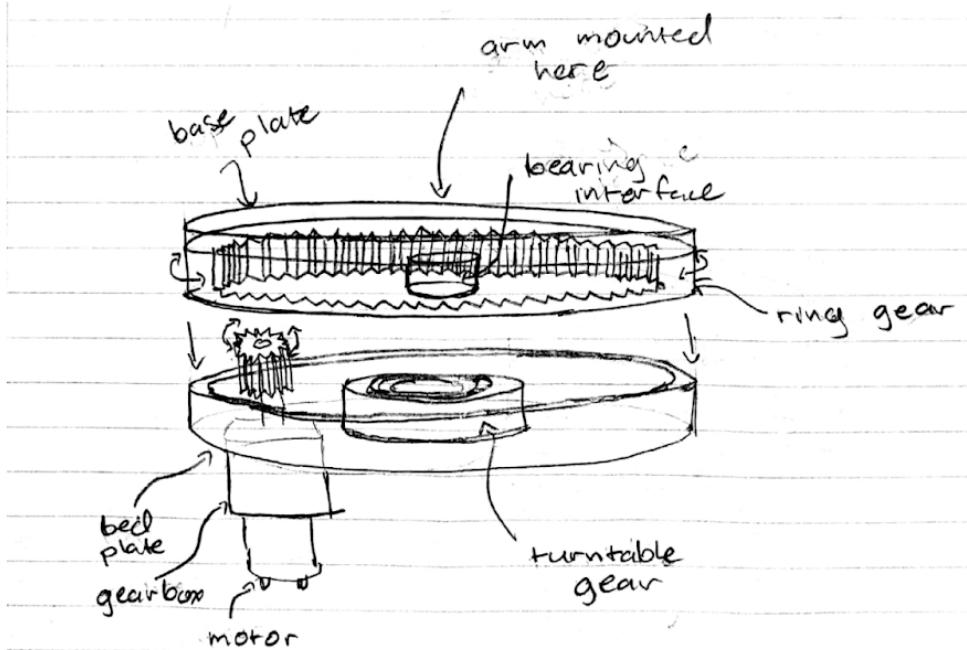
Ring Gear Driven Turret with Gearbox Reduction
